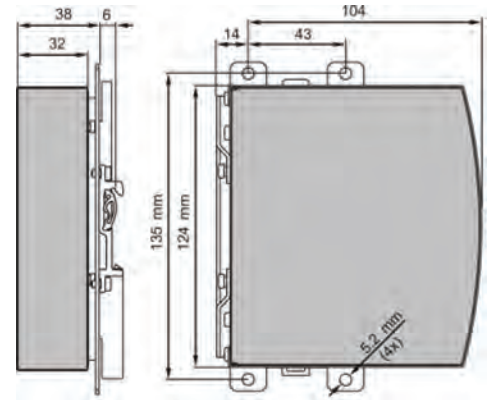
Side Mounting Without DIN Rail Brackets
